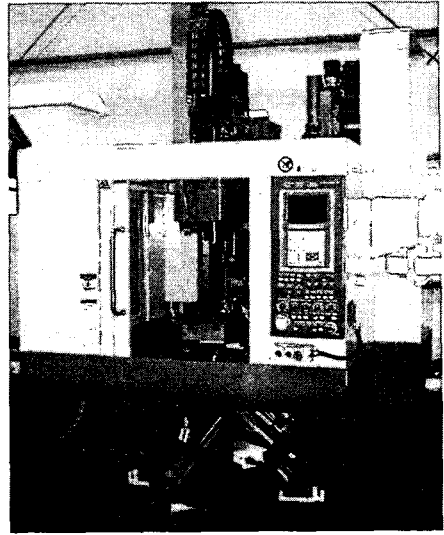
(a) 6-Axis MC with parallel tilting table constructed for complex shape machining
